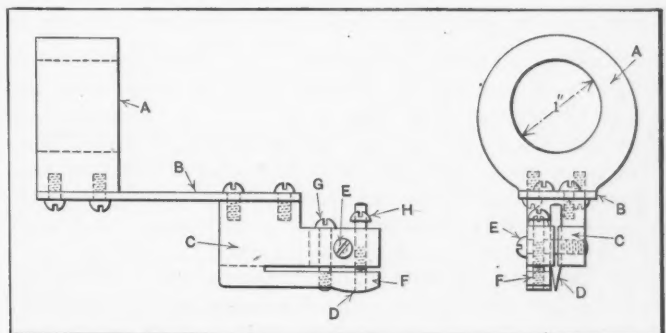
Graduating Tool for cutting Fine Lines of Uniform Depth
